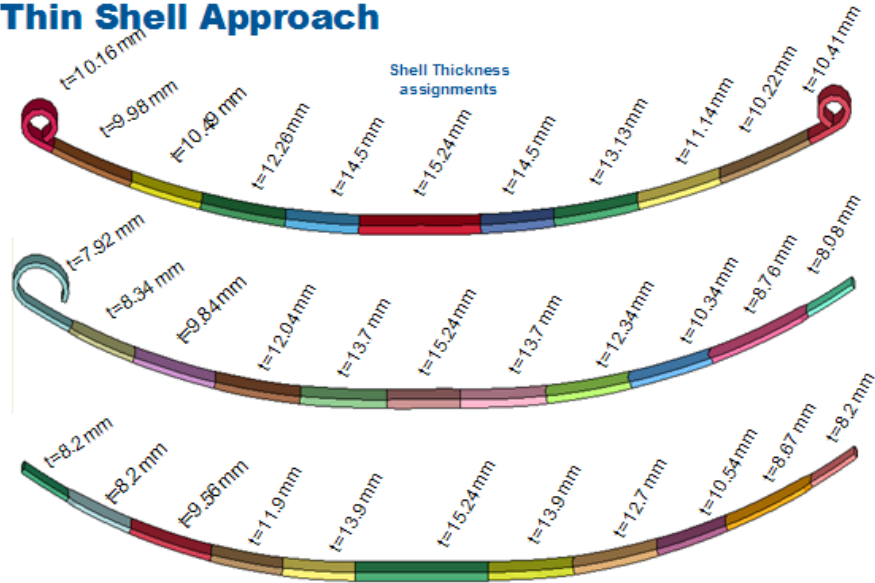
Illustration. Exploded View of Leaf-spring Thin Shell Model
